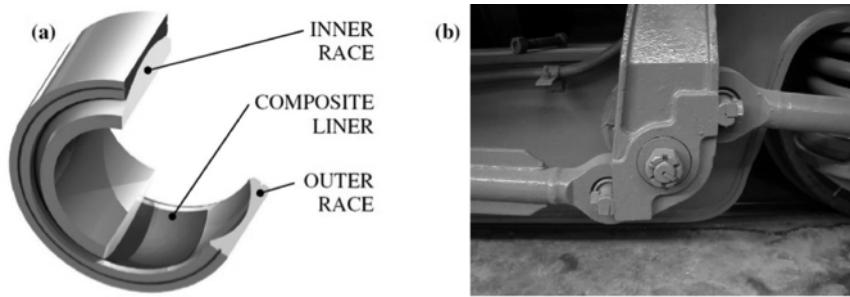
Plain spherical bearing; (a) CAD cut-away view (final bearing product, after the nosing process and additional machining of the outer race has been completed), (b) example application (rail locomotion)
